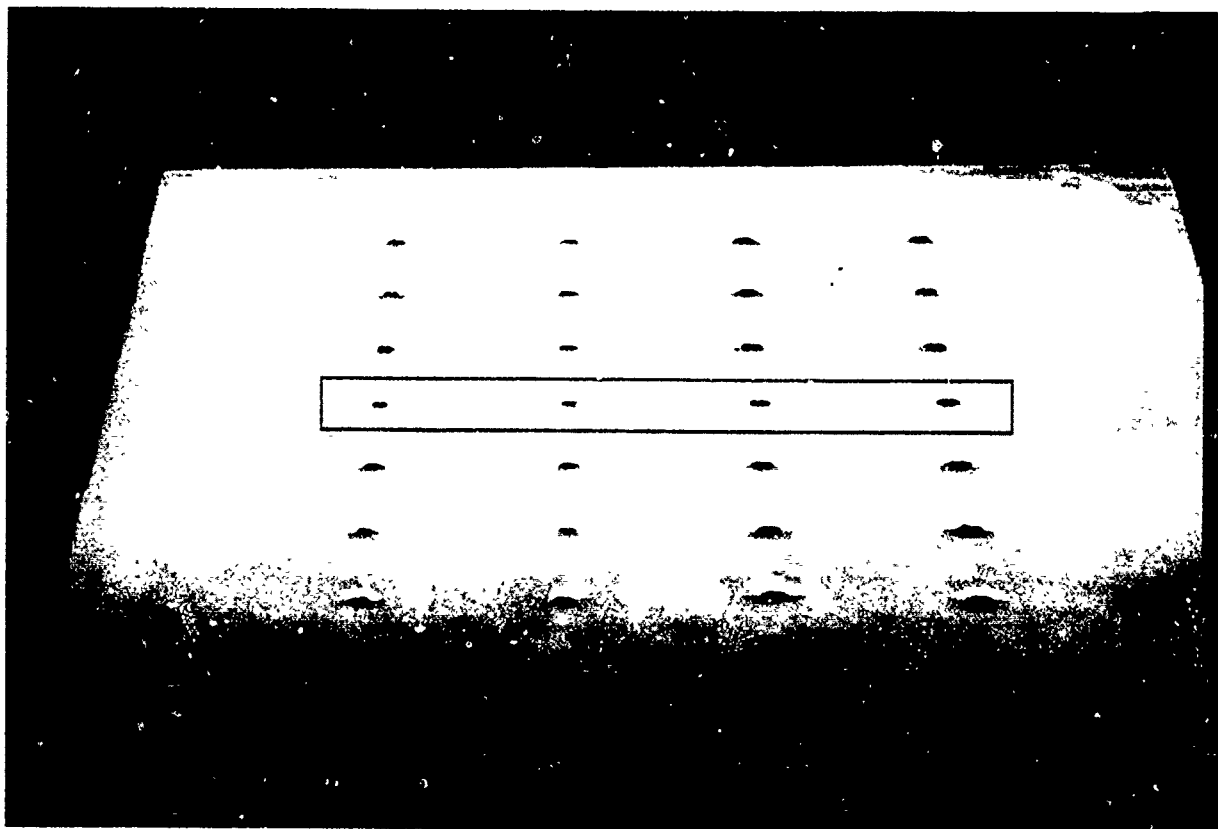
D-Sight image of Al 7075-T6 panel with cold worked holes
